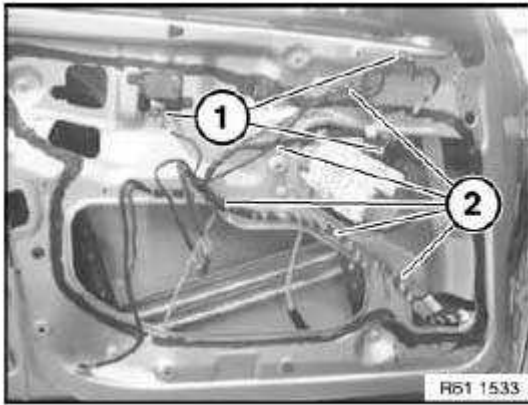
Identifying Plug Connection And Door Wiring Harness Points
